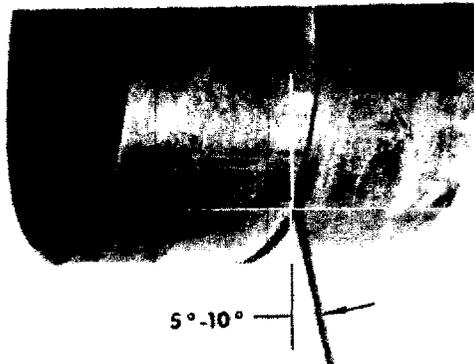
Correct electrode angle for welding in the 6:30 position.
